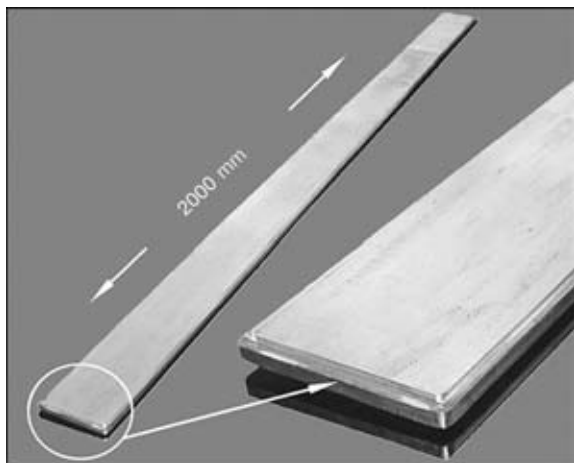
Long Cu + Ag bimetal target cathode produced by the precision explosion welding technology
